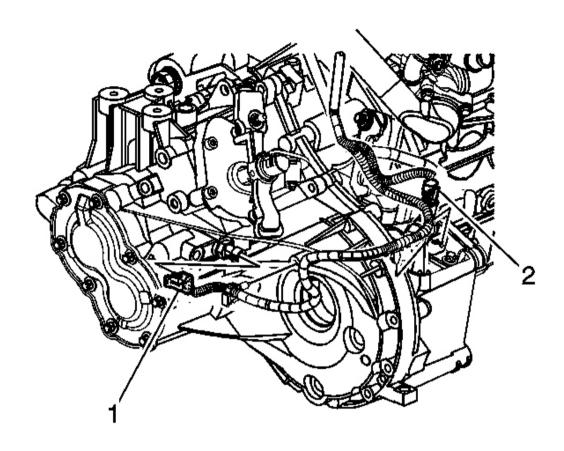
Front Wheel Speed Sensor VSS Electrical Connector Courtesy of GENERAL MOTORS CORP.
